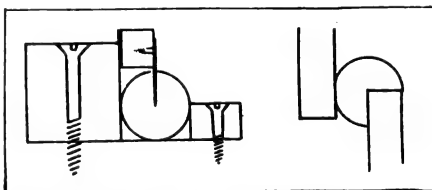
Making Windshield Tight; Illustrating Home-Made Cutter.
